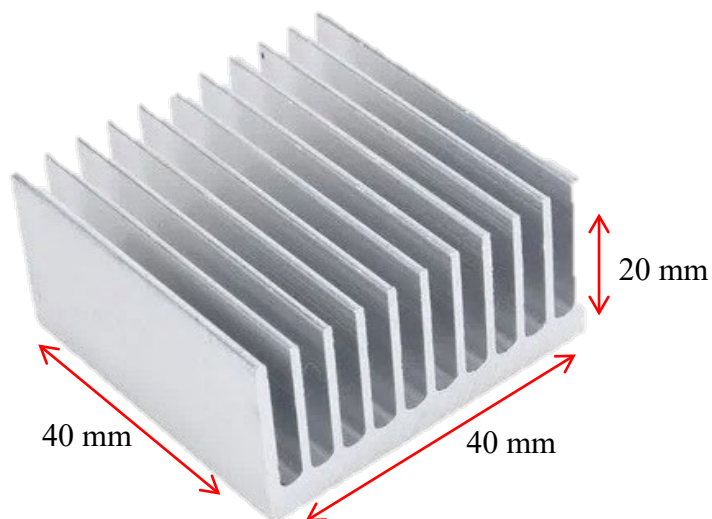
Aluminium Heat Sink With 20 mm Fins.
